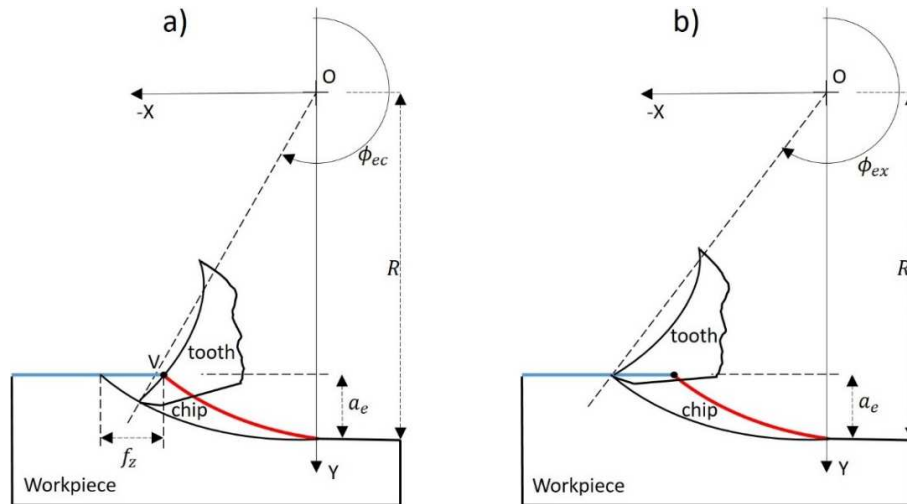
Up milling geometry. a) Tool contact with unmachined zone, b) Tool contact with the machined zone
